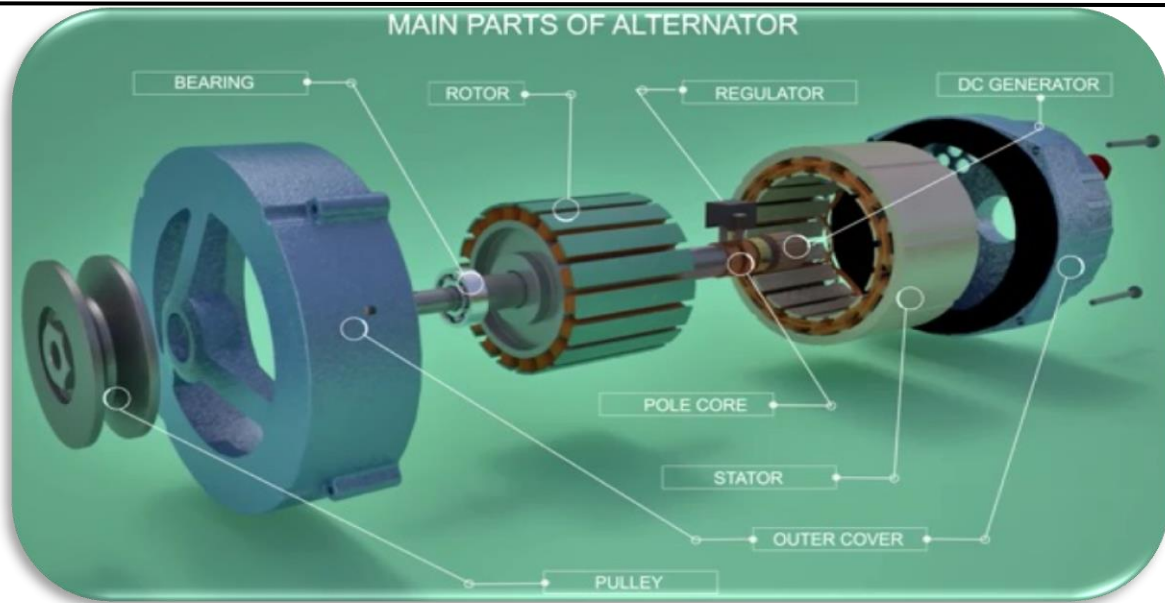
The main parts of Alternator are rotor, stator bearing, slip-ring.
